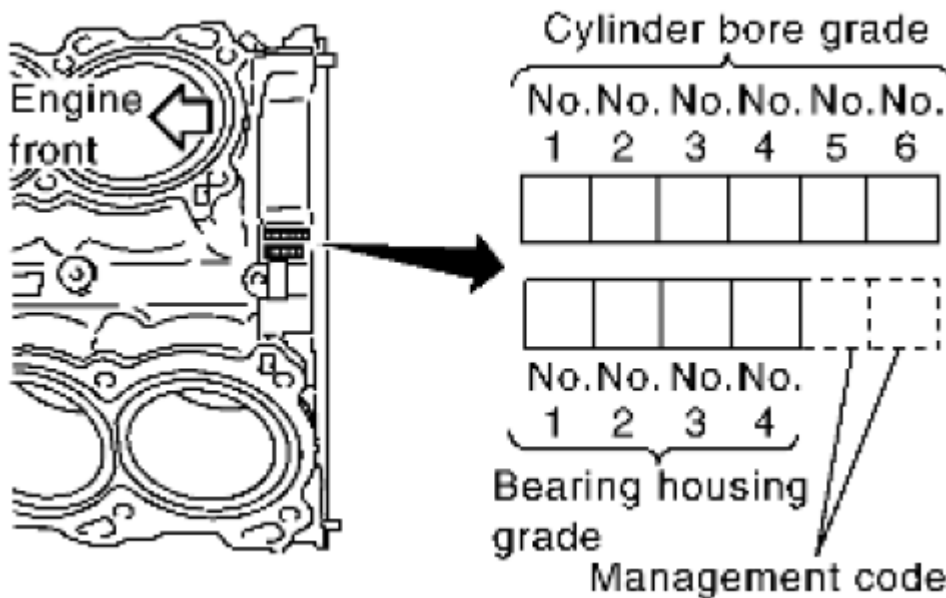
Identifying Cylinder Bore Grade And Bearing Housing Grade
